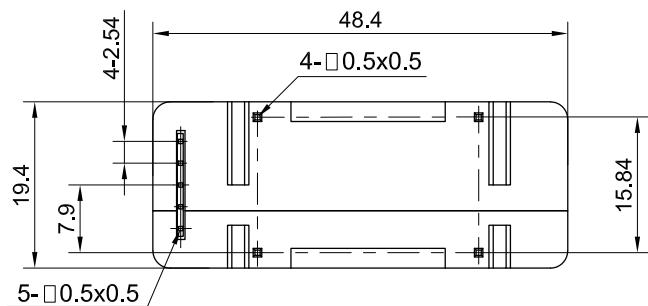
Dimension (unit: mm, tolerances for unmarked scales ± 1 mm)
